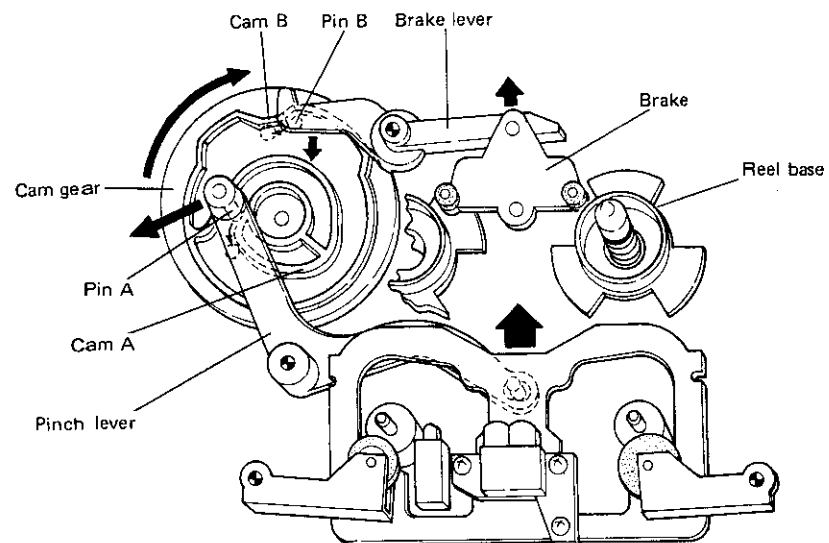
Major mechanical components (Stop mode, frontal view)
